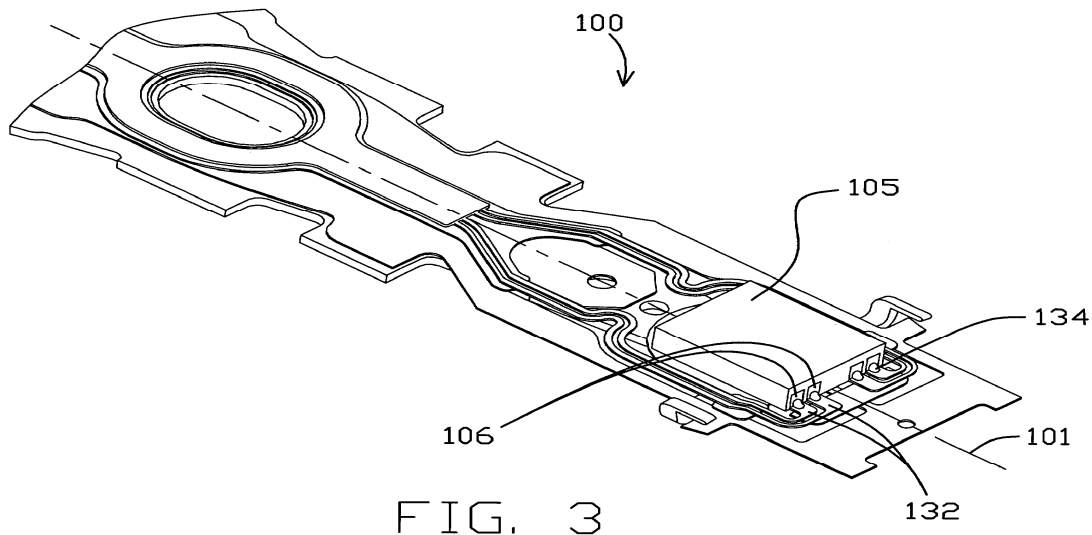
, reproduced above, depicts head suspension 100, head slider 105, head slider bonding pads 106, trace bonding pads 132, and solder balls 134. Ex. 1101, 3:28–43. Solder balls 134 are applied at the juncture of head slider bonding pads 106 and trace bonding pads 132 to electrically connect head slider 105 to traces 130. *Id.* at 3:43–45. More specifically, the
